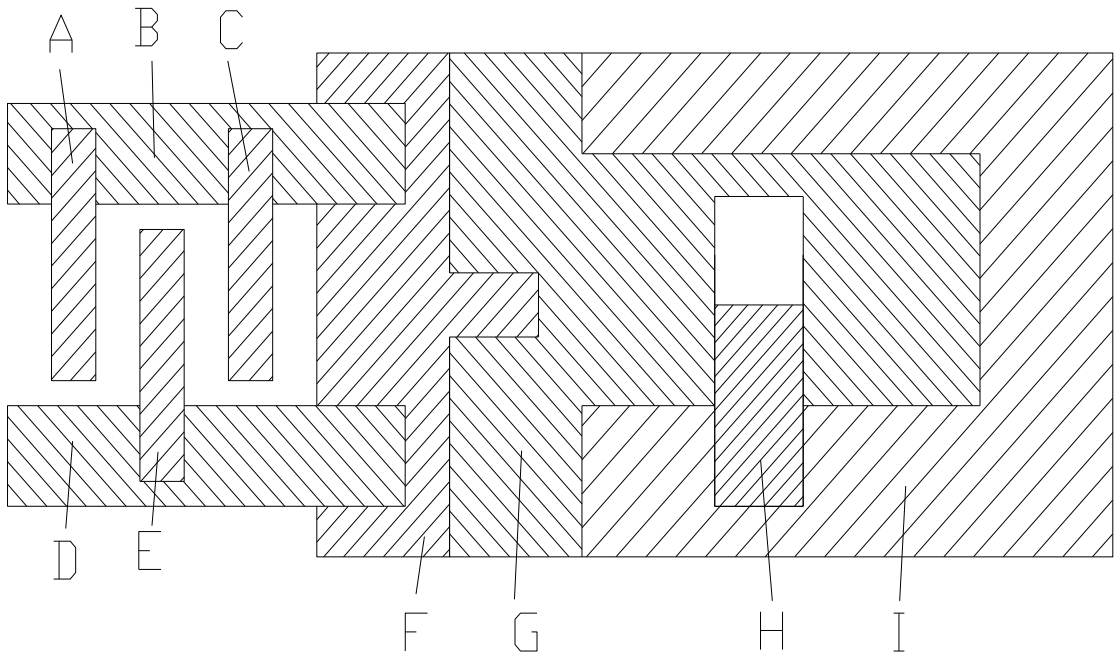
A product that can be assembled with a NC-S-L-NM assembly
